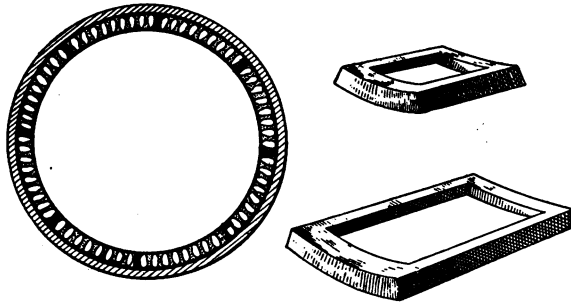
Lining made of pebbles cemented in cast-iron frames.
